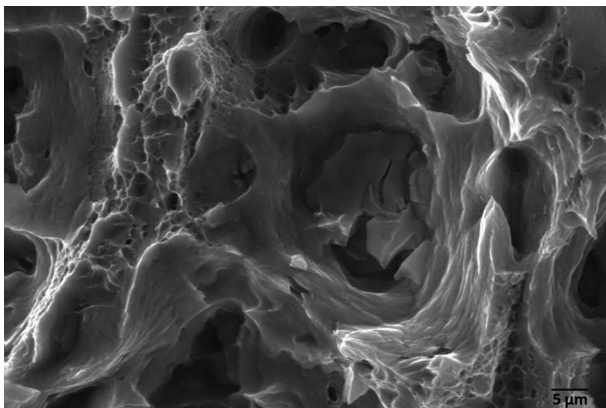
High magnified image of the fracture surface presented in Fig. 190
